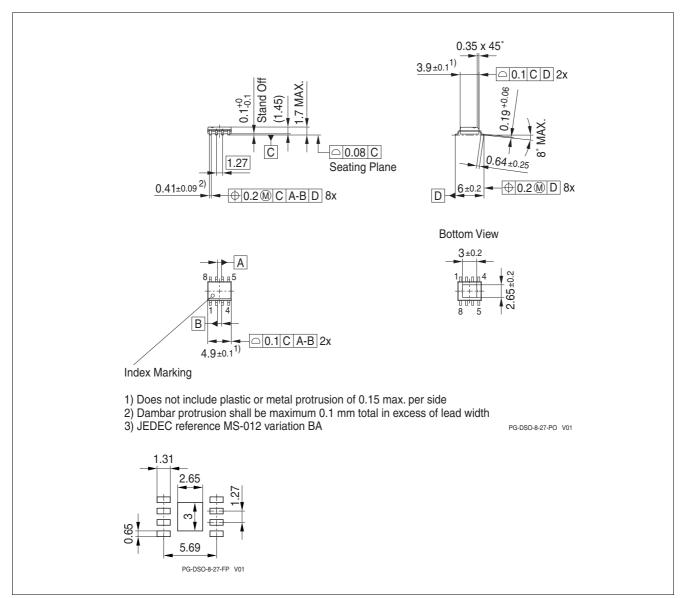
PG-DSO-8 (exposed pad) Outline and recommended footprint for reflow soldering
